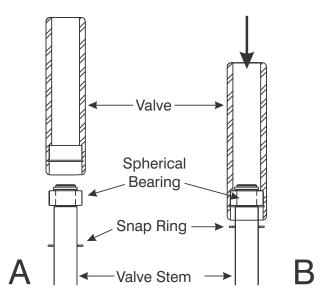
Seat Bearing Against Internal Shoulder of the Valve.
